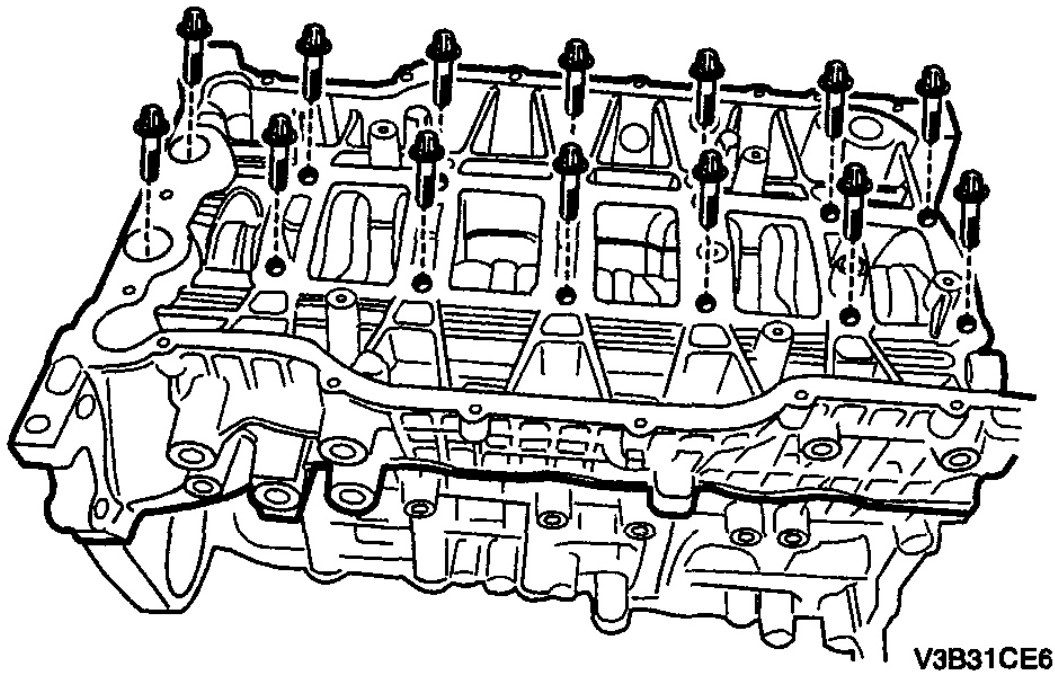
Identifying Bed Plate Inner Bolts Removing Sequence
